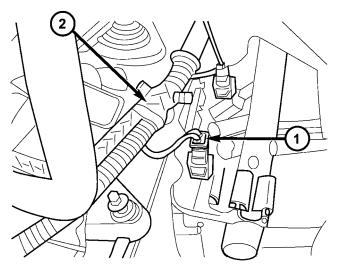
FUEL RAIL & INJECTORS - 2.4L TURBO REMOVAL - 1.6L
